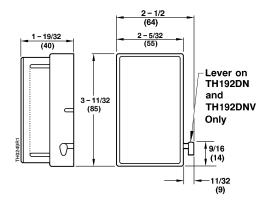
TH 192 DN and DNV Dimensions in Inches (Millimeters).
